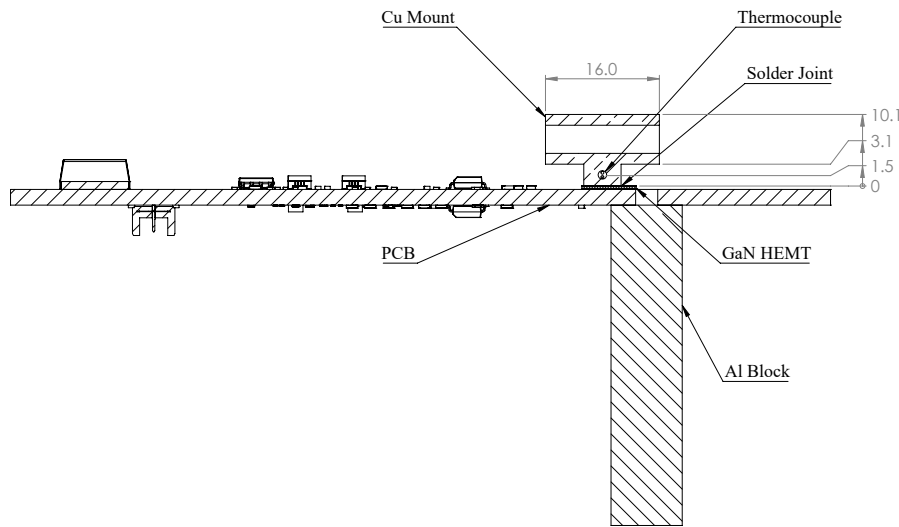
Section view of the test platform showing the cooling arrangement for the cryogenic testing (dimensions in mm).
